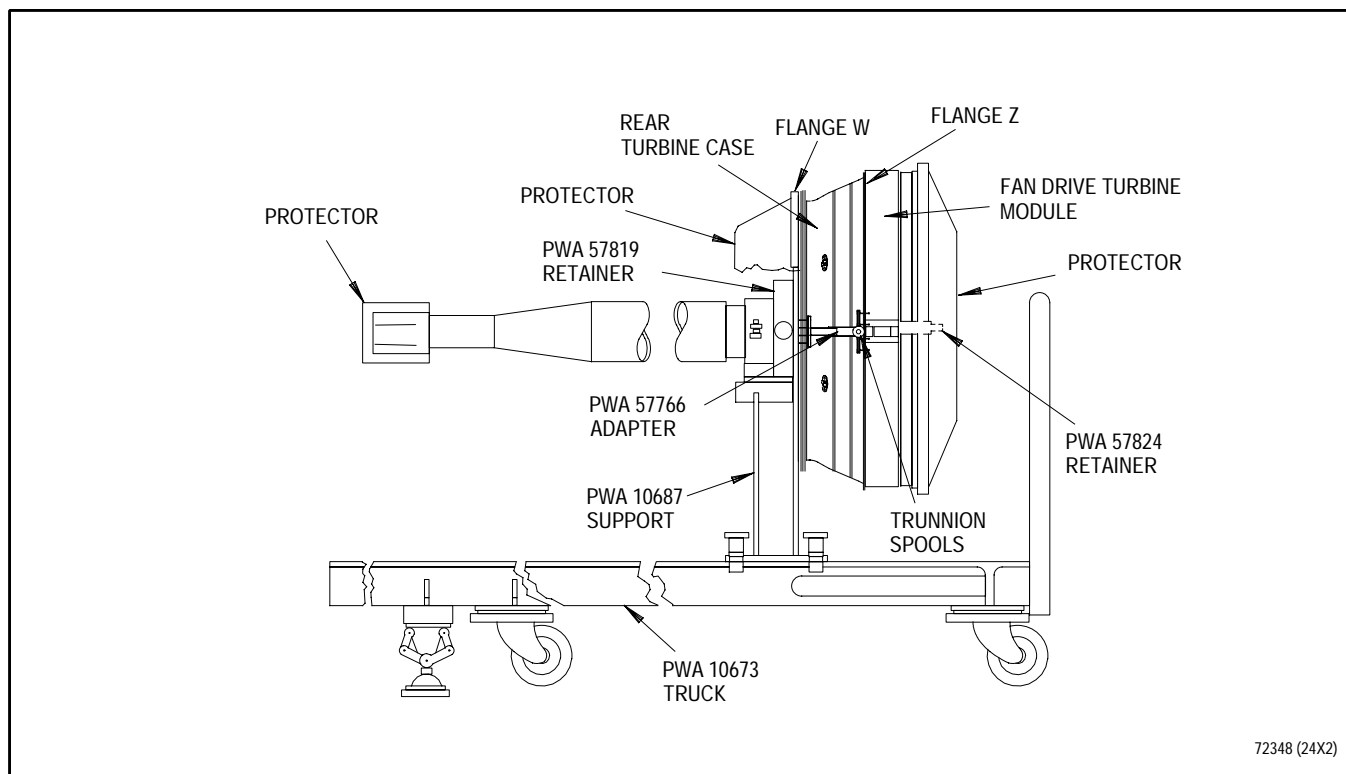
Fan Drive Turbine Module Installed in PWA 10673 Truck
